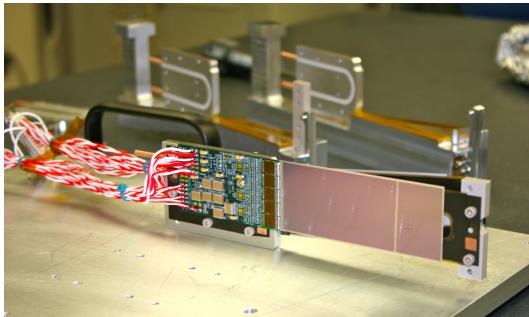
A prototype module assembly (foreground) with the 50 mrad (left) and 100 mrad (right) module assembly fixtures in the background. A pair of cooling blocks and a spacer block can be seen on the fixtures.
